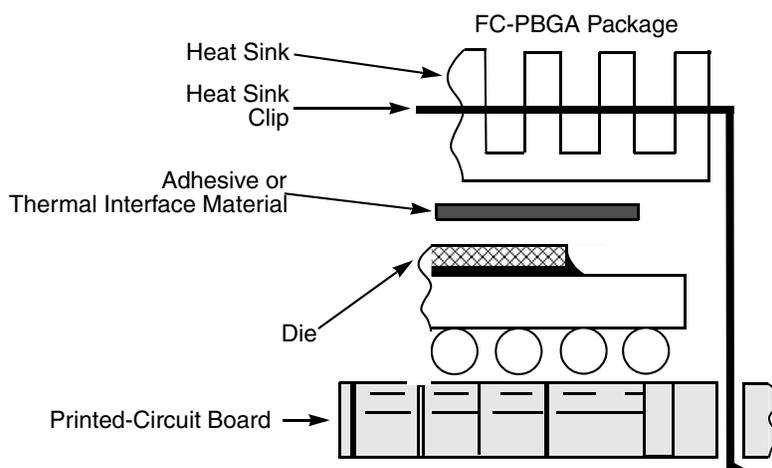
Package Exploded Cross-Sectional View with Several Heat Sink Options
